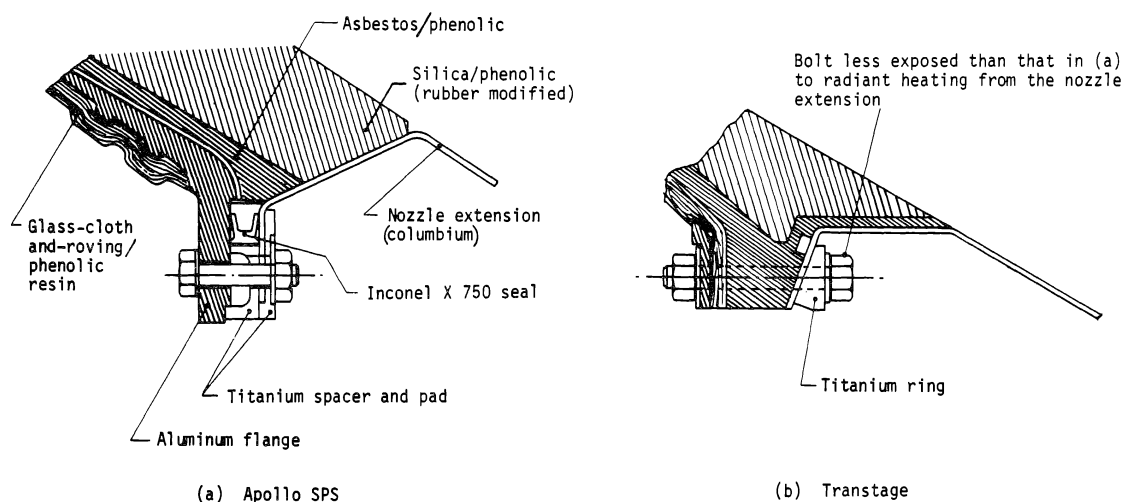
Two designs for attachment of ablative chamber to nozzle extension.
